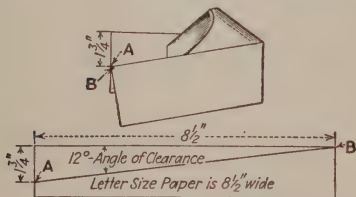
A piece of paper $8\frac{1}{2}$ in. long marked off $1\frac{3}{4}$ in. and wrapped around a drill as shown will indicate 12-deg. clearance.
